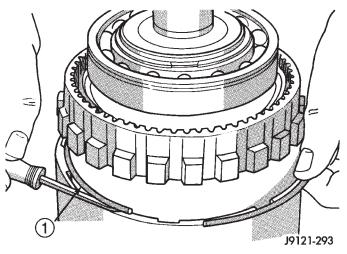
Clutch Drum Outer Retaining Ring Removal 1 – OUTER RETAINING RING
